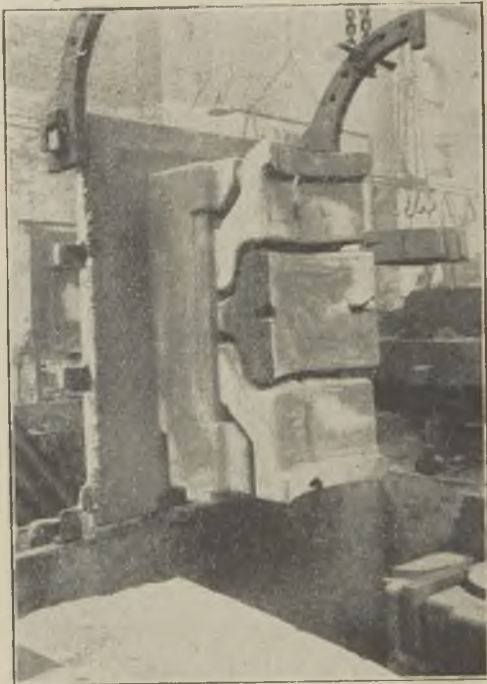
STEAM CHEST CORE BEING LOWERED INTO THE MOULD.
